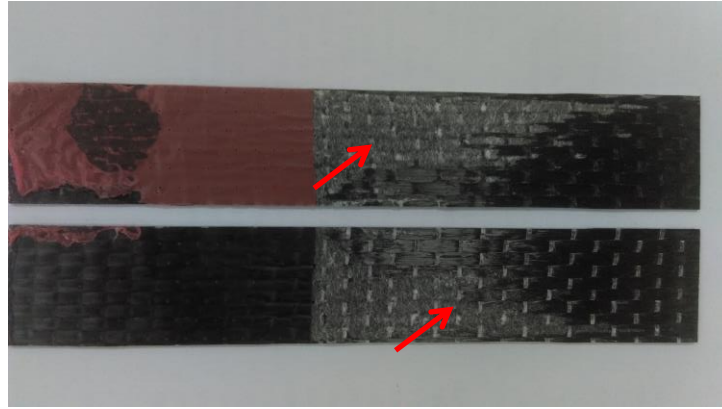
Photograph of the DCB surfaces of fractured m-PA66 composite.
